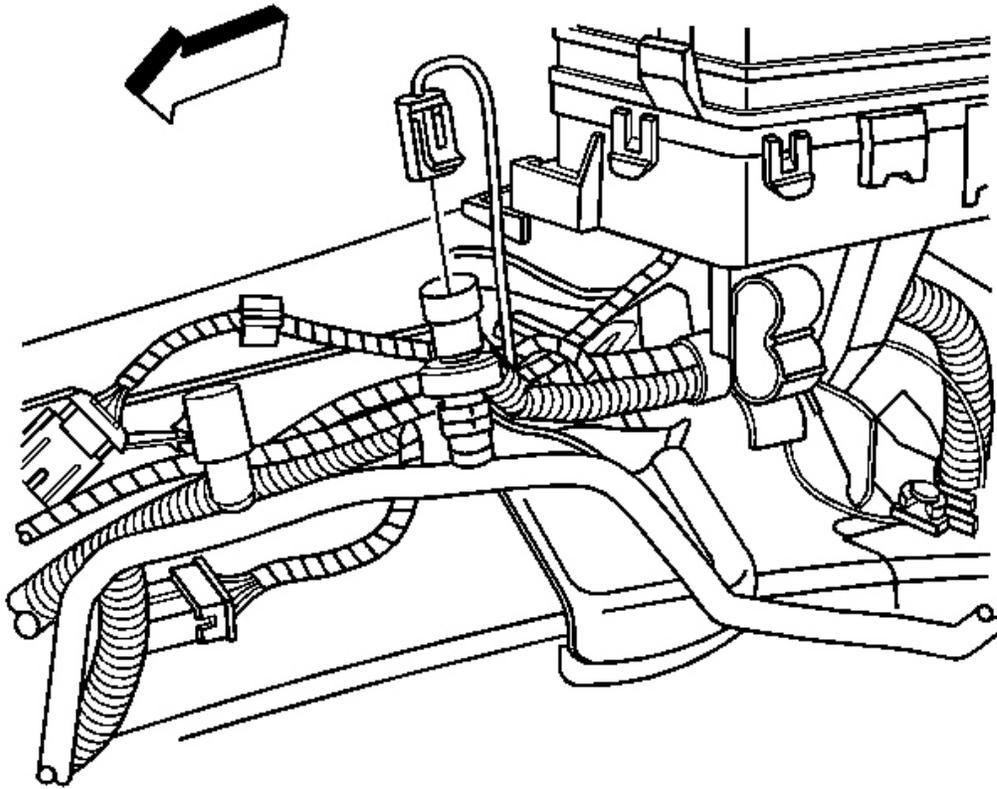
View Of A/C Electrical Connector & Pressure Sensor
